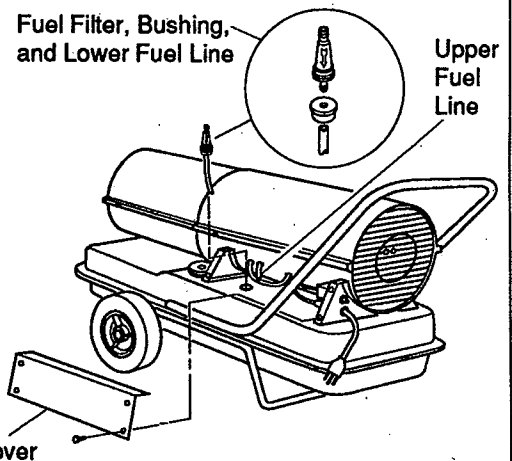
Fuel Filter Removal, 100/150,000 BTU/Hr Models
